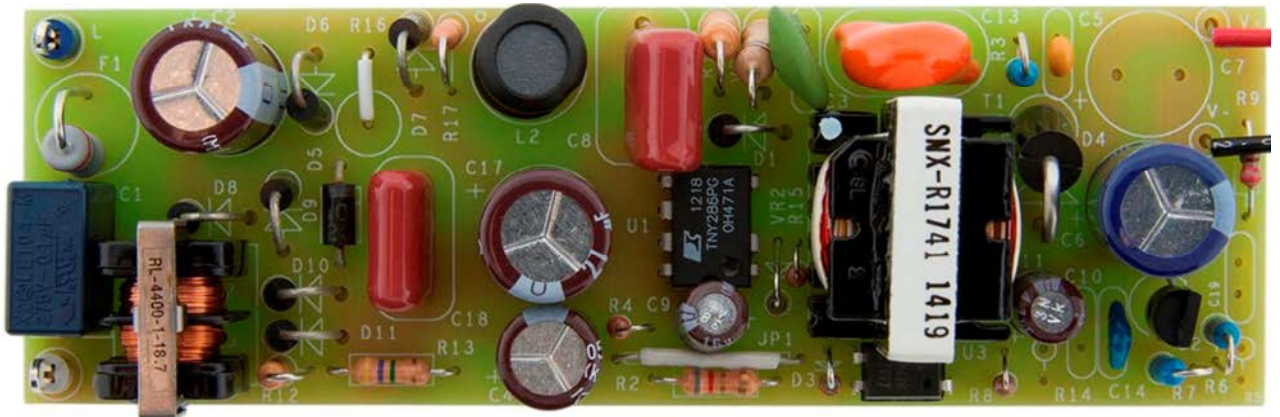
Top Assembly, No Components on the Bottom Side. Some Parts can be Converted to SMD for More Compact Applications.
